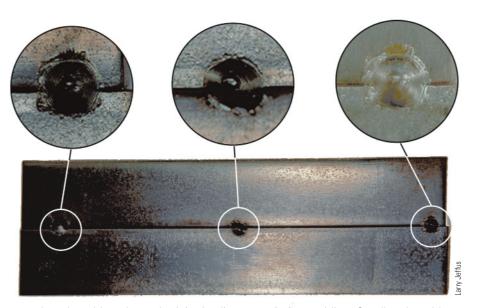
Use enough tack welds to keep the joint in alignment during welding. Small tack welds are easier to weld over without adversely affecting the weld.
